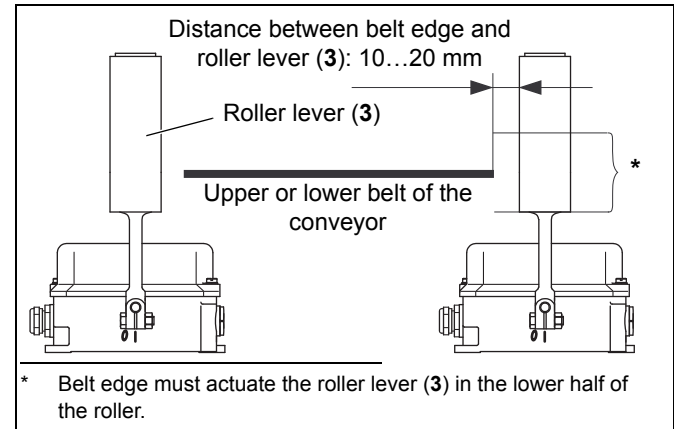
Paired belt misalignment switches mounted on the conveyor
